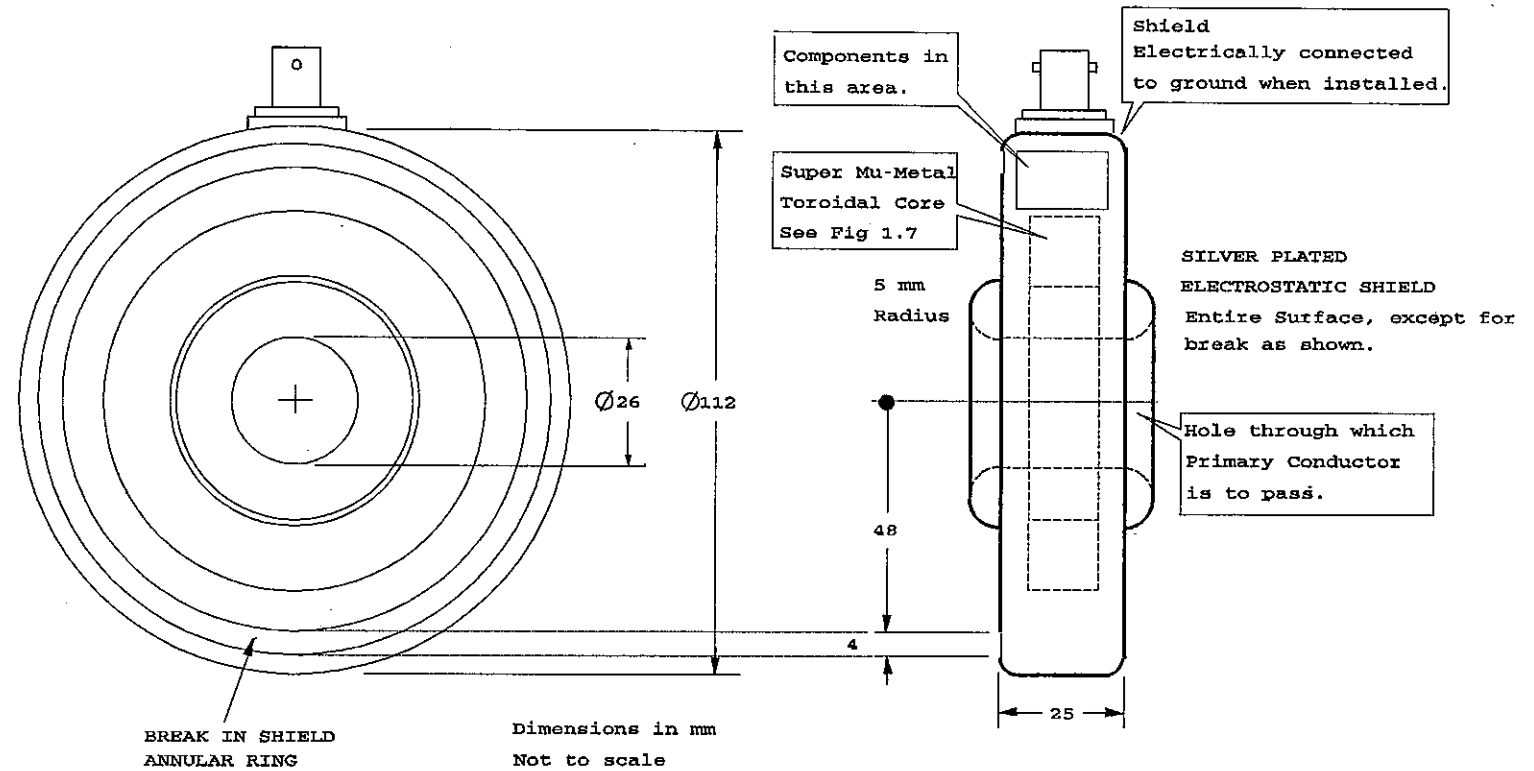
RESIN MOULDED CORE ASSEMBLY
